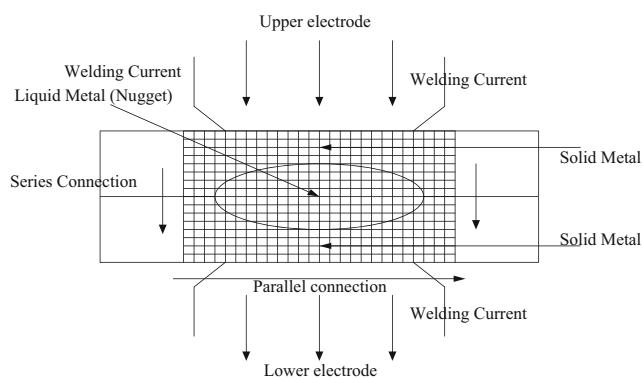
Workpiece dynamic resistance during the welding process
